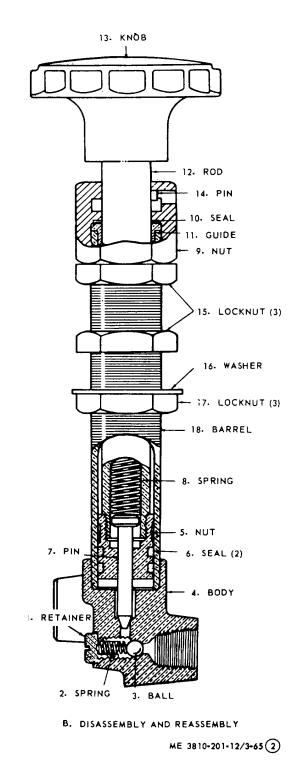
Primer pump (for engine model D333TA) removal, disassembly, reassembly and installation (sheet 2 of 2).
